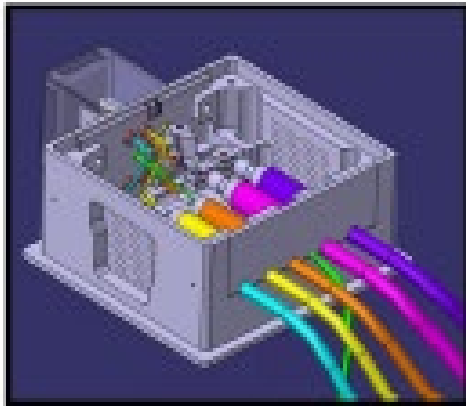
DPG assembly with cables connected. Fig 3 DPG head & head housing assembly (90°)
